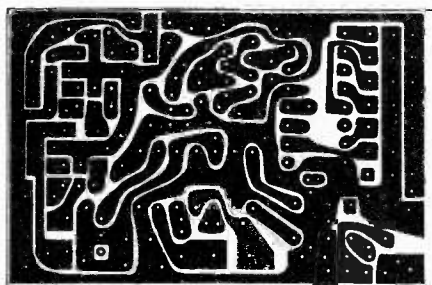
Printed circuit board for the EE Radio Control Receiver, actual size.
